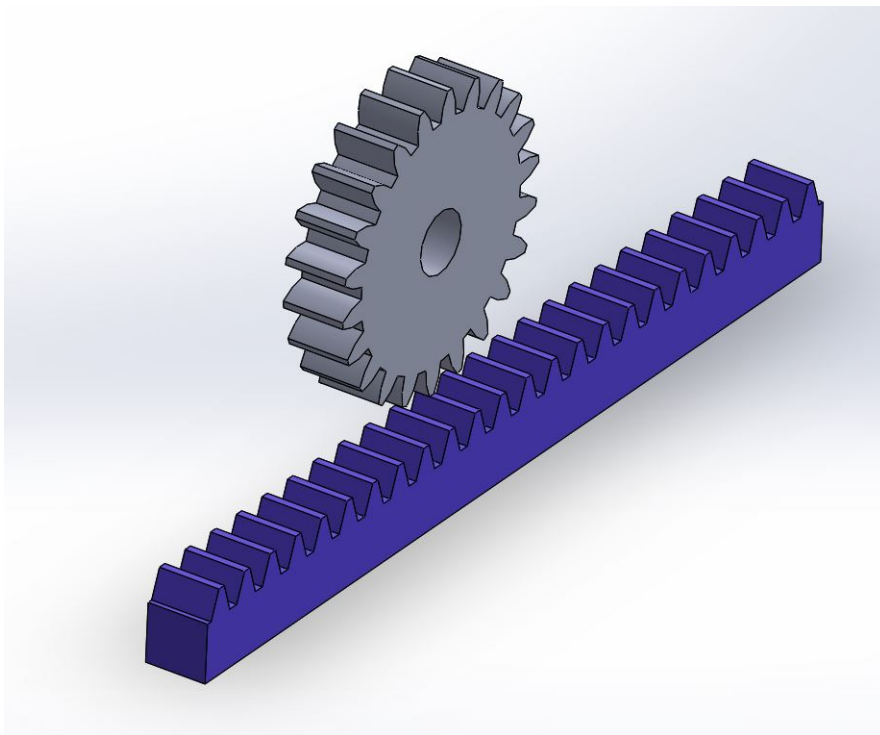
Gear mechanism of the power transmitting pin CAD image.
